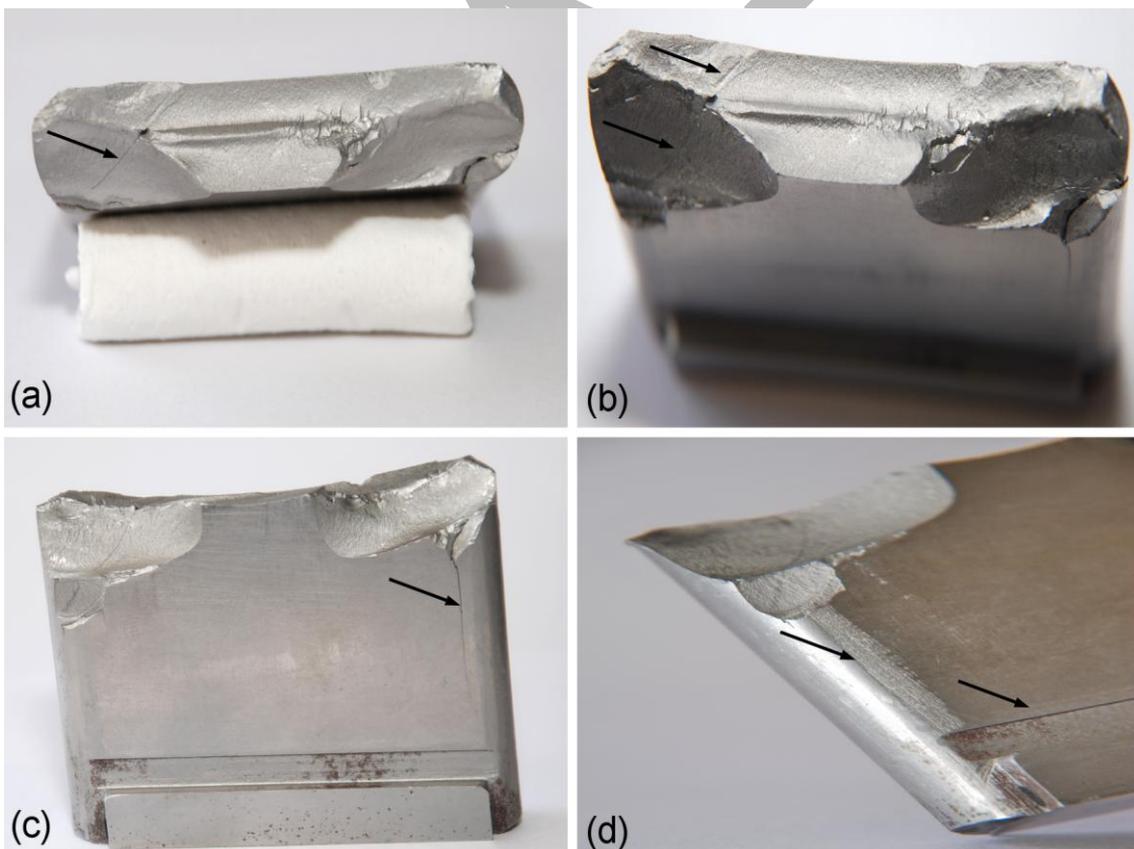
General aspects of the fragment of D1 cutting tool; (a) Fracture surface, (b) Striations on the fracture surface, (c) Secondary crack on the lateral surface, (d) Abrasion on the lateral surface of the tool.
